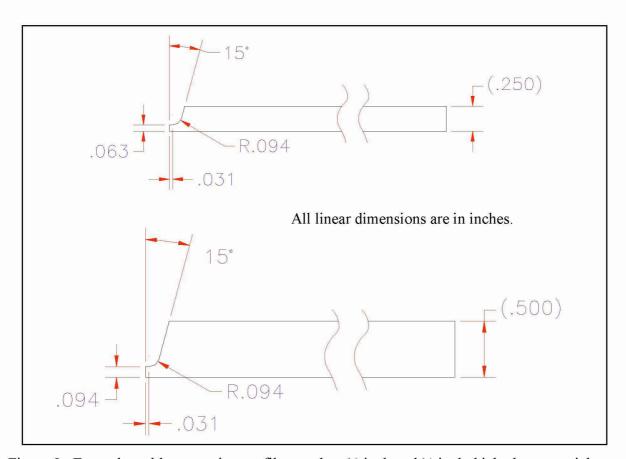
Example weld preparation profiles used on 1/4-inch and 1/2-inch thick plate material.
